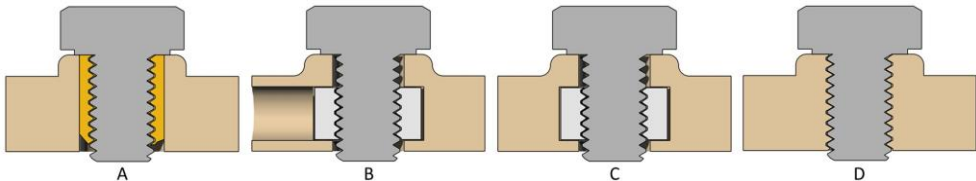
Some examples of methods to add threads to FFF components. Inserts (A), Nut with side pocket (B), in-print cavity (C), and threading (D).
